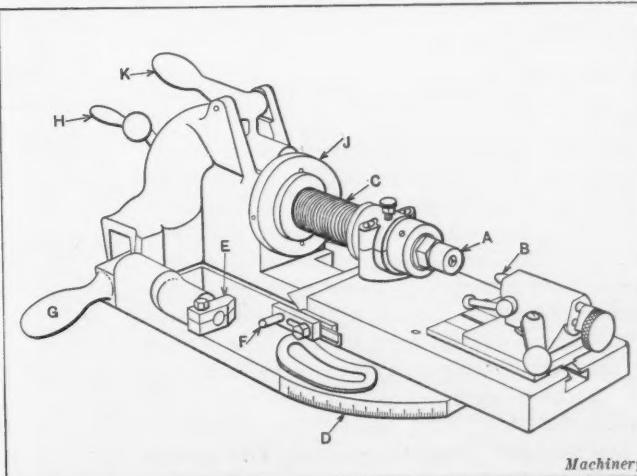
Detail View, showing Lead-controlling, Indexing and Automatic Trip Mechanism of Machine illustrated in Fig. 30
